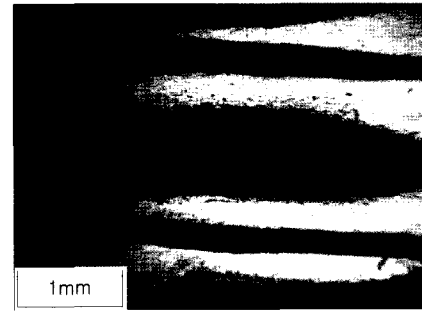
Weld cross section for Experiment 2-3(S)
